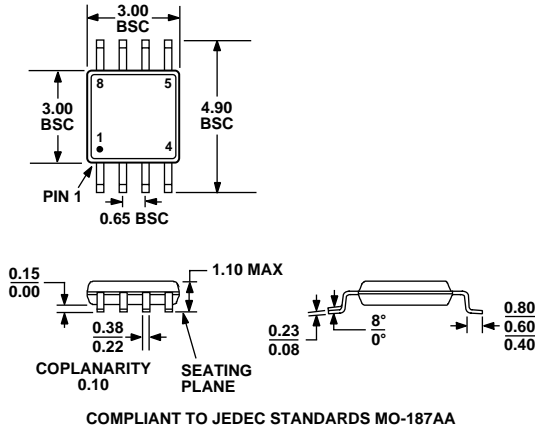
8-Lead Mini Small Outline Package [MSOP] (RM-8)
